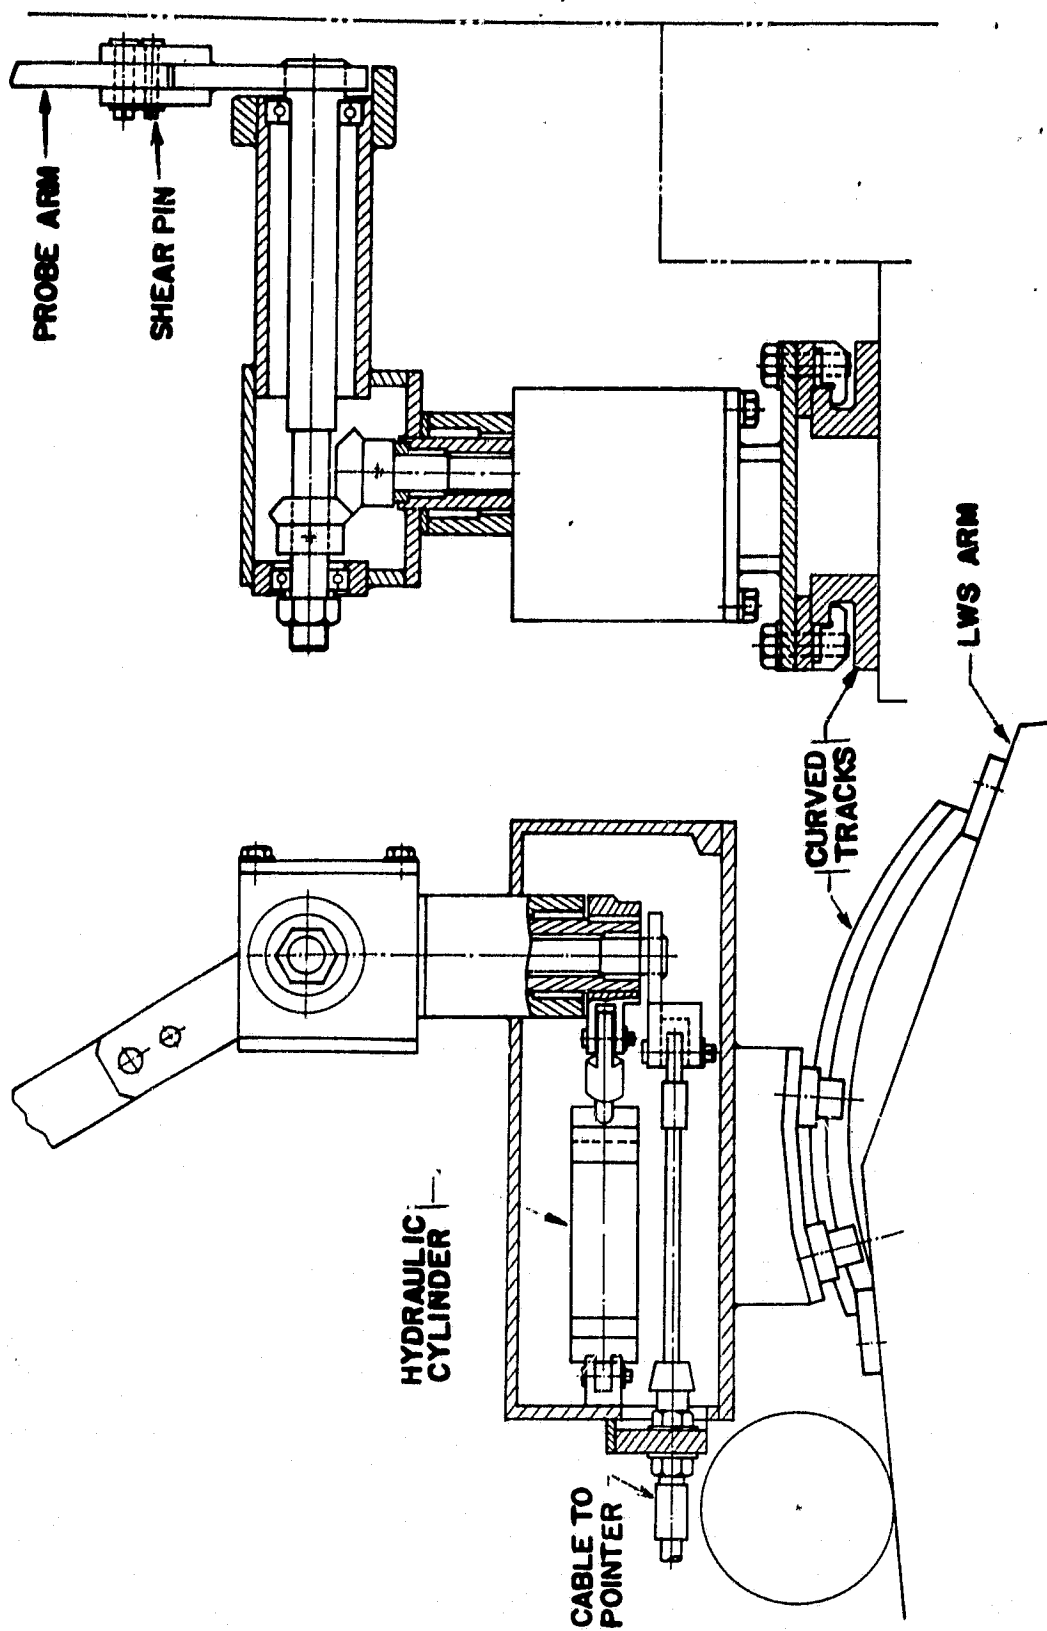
LAST CUT FOLLOWER MECHANISM WITHOUT CAM
